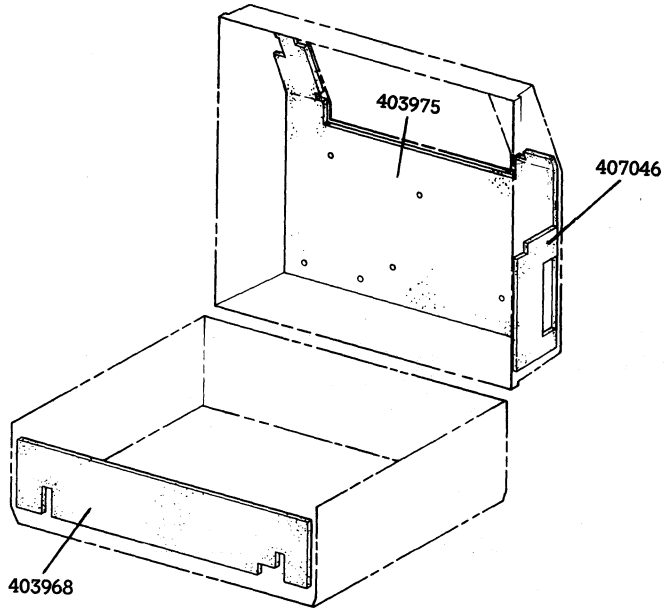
Pads Used on 40CAB351/YZ Printer Cabinet Core for Adjacent or RO Tractor Feed Printer – 80-Column
